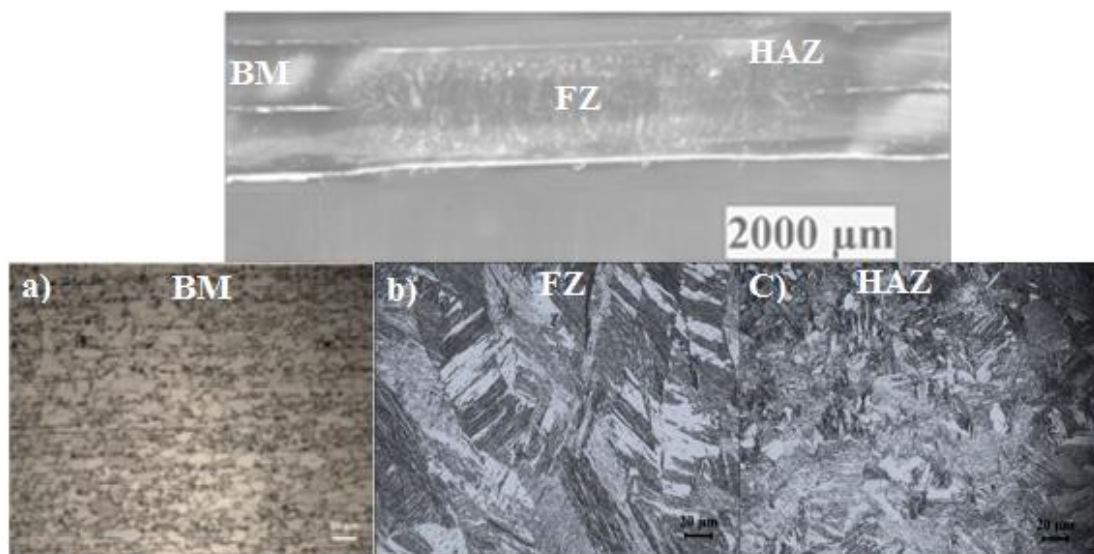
The weld zone profile and its microstructures of DP600 weldment joined with 3.5 Bar electrode force with 4kA welding current. a) base metal (BM), b) Heat Affect Zone (HAZ), c) weld nugget (FZ).
